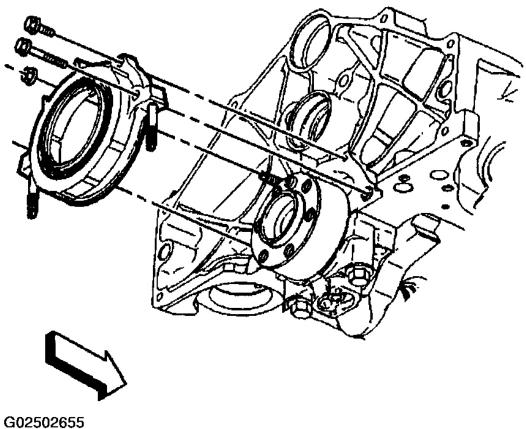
Installing Crankshaft Rear Oil Seal Housing Courtesy of GENERAL MOTORS CORP.
